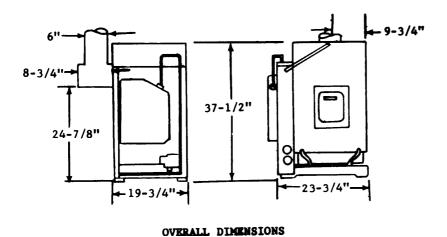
Heater, space; oil-fired, 70,000 btu/hr; dimensions and accessories (barracks heater).
